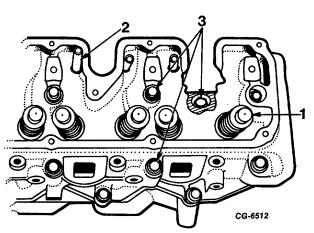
Removing Valve Caps, Push Rods and Head Mounting Bolts
